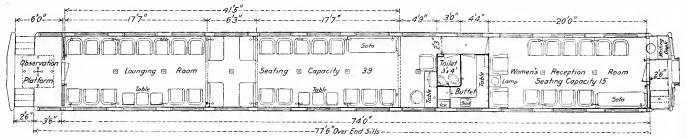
Floor Plan of Chicago, Burlington & Quincy Parlor Car with Reception Room for Women.
